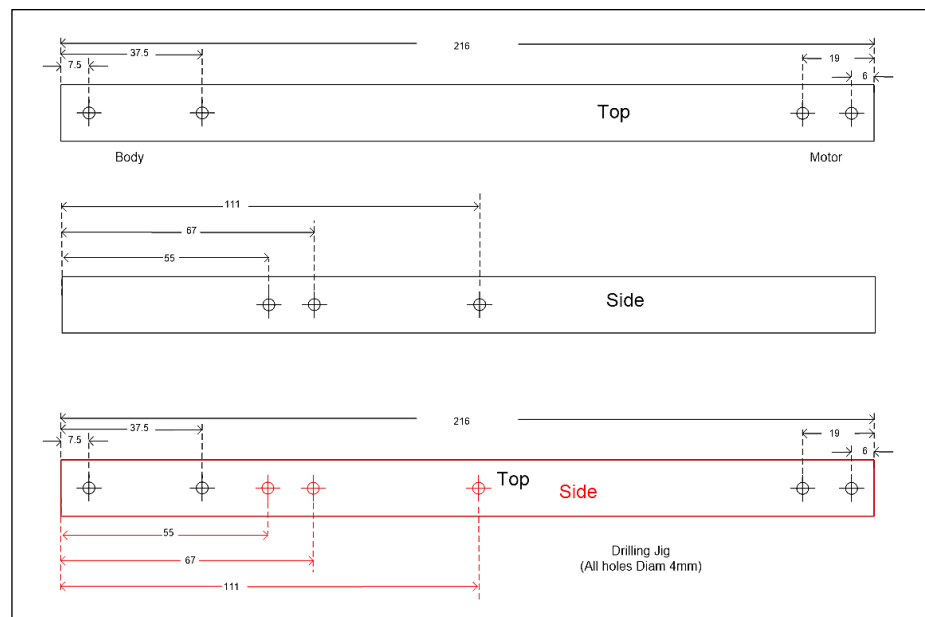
Motor Arm dimensions and Drilling Jig
